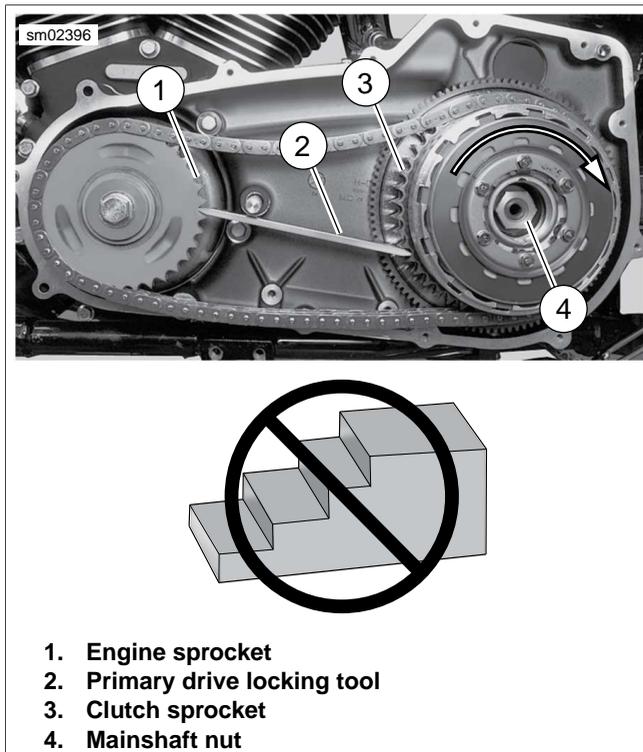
Removing Clutch Hub Mainshaft Nut
